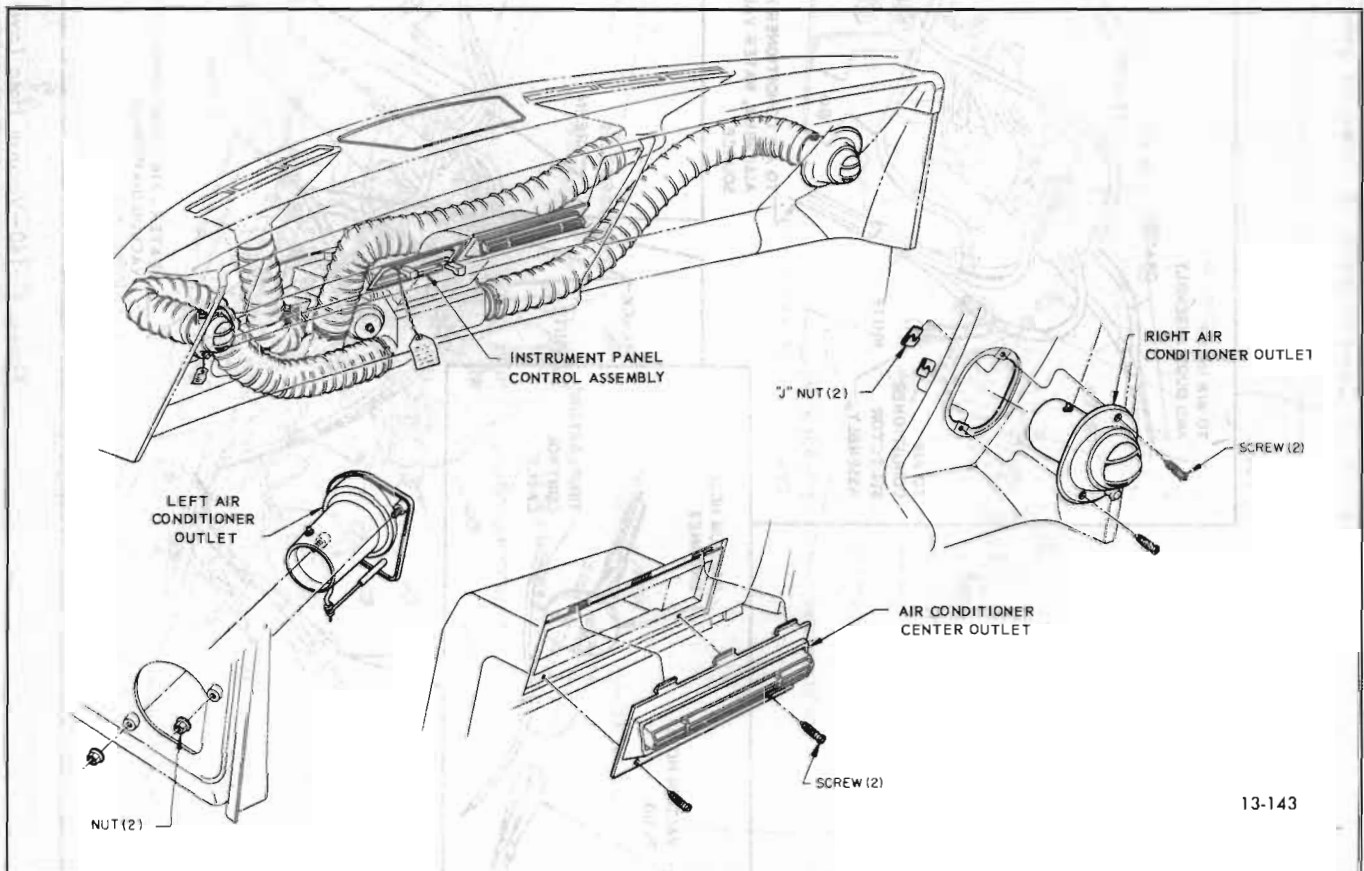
Installation of Air Conditioner Outlets (49000 Series)
